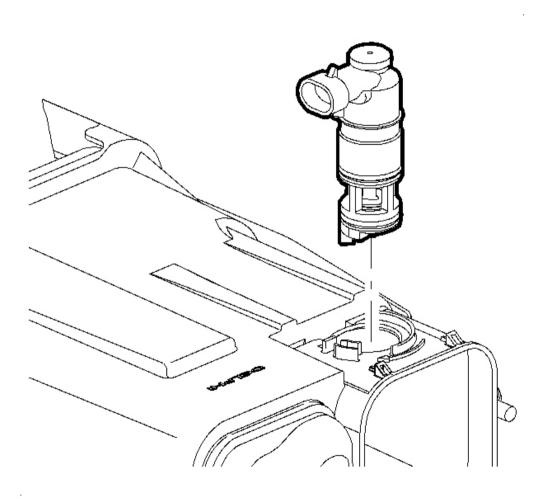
View Of EVAP Vent Solenoid Courtesy of GENERAL MOTORS CORP.
